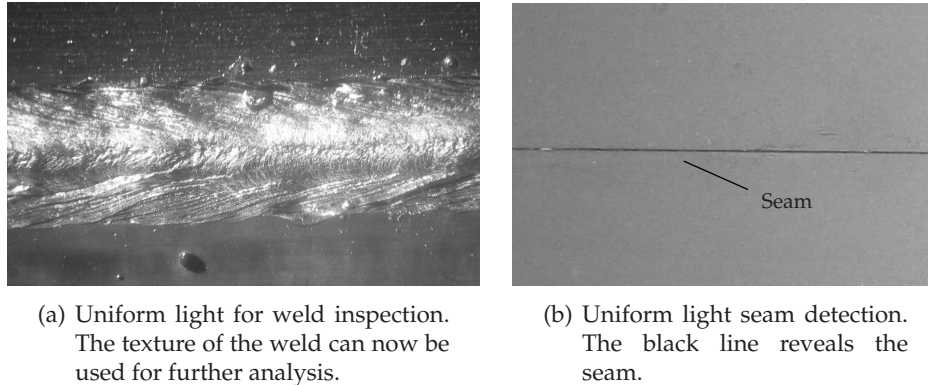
Uniform light can be used for texture analysis in weld inspection and can provide the lateral seam position in butt joint configurations.
